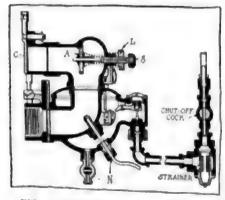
8CHEBLER CARBURETER OF I. H. C. CAR
